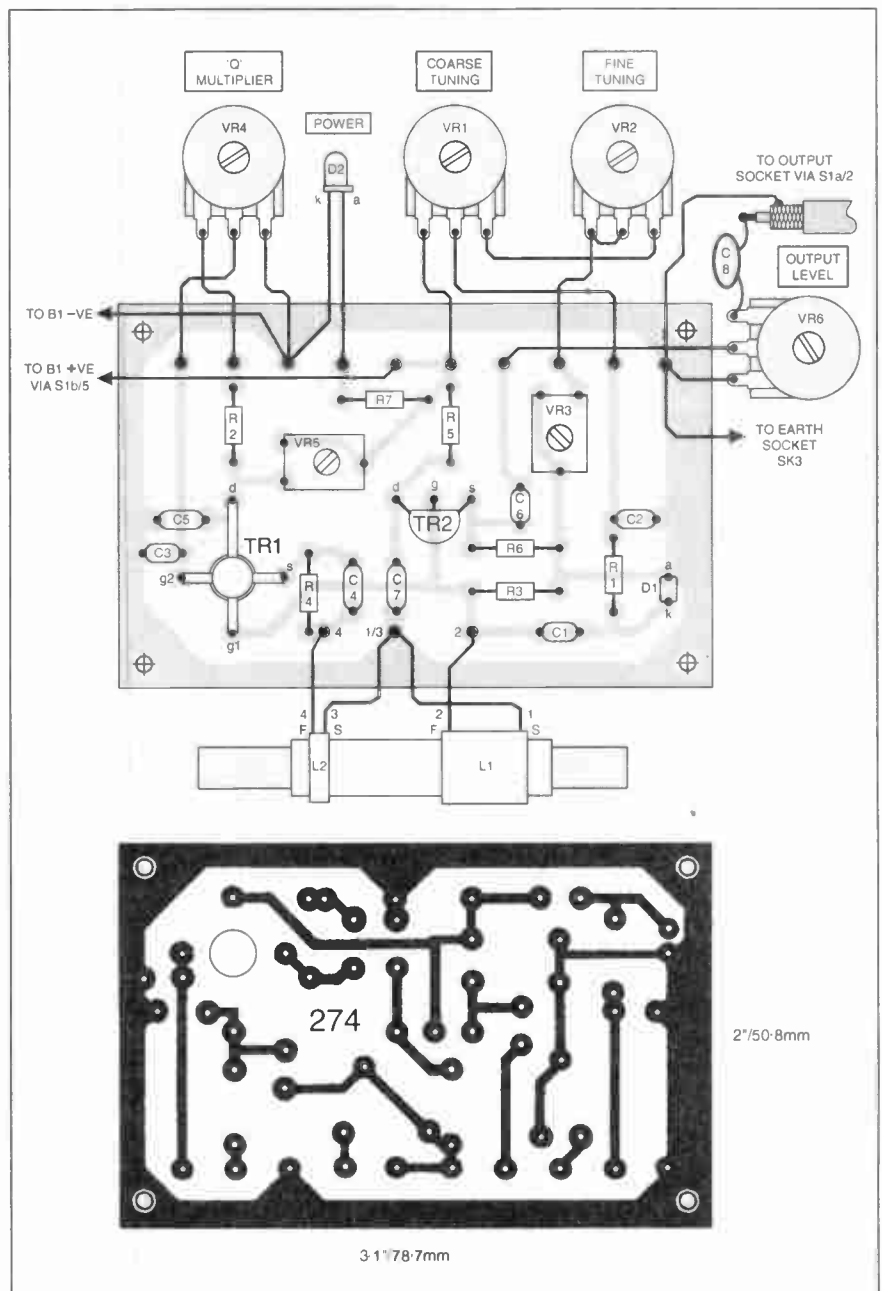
Printed circuit board topside component layout, off-board wiring and full-size copper foil underside master. Note capacitor C8 is mounted directly on one outer tag of VR6 and soldered to the centre core of the output screened lead.
